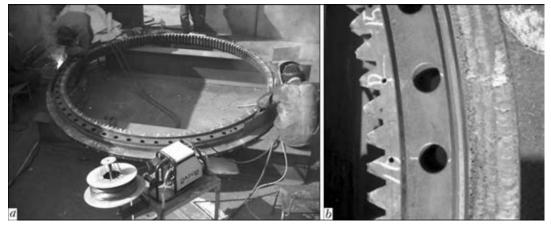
Cladding on gear ring simultaneously by two cladding operators (*a*), and clad region of gear ring (*b*)
